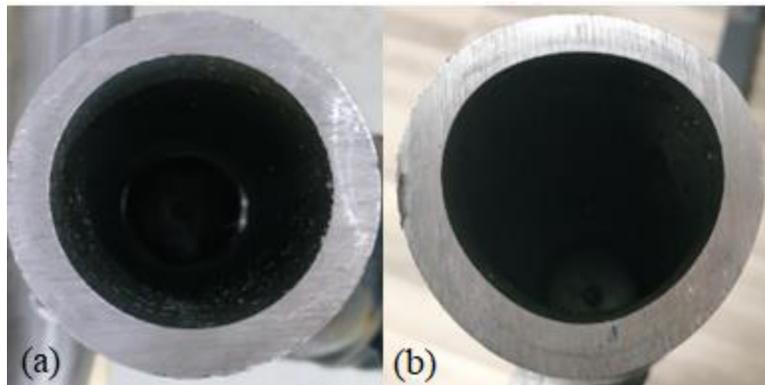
Cross Sectional Area of Pipe (a) Before Bending (b) After Bending
